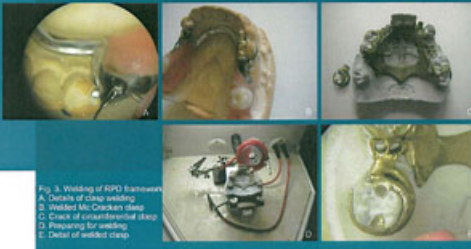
Welding of KPD frameworks: A. Details of cast welding; B. Welded Mc Craken stamp; C. Cast of conventional stamp; D. Preparing for welding; E. Detail of welded stamp.
